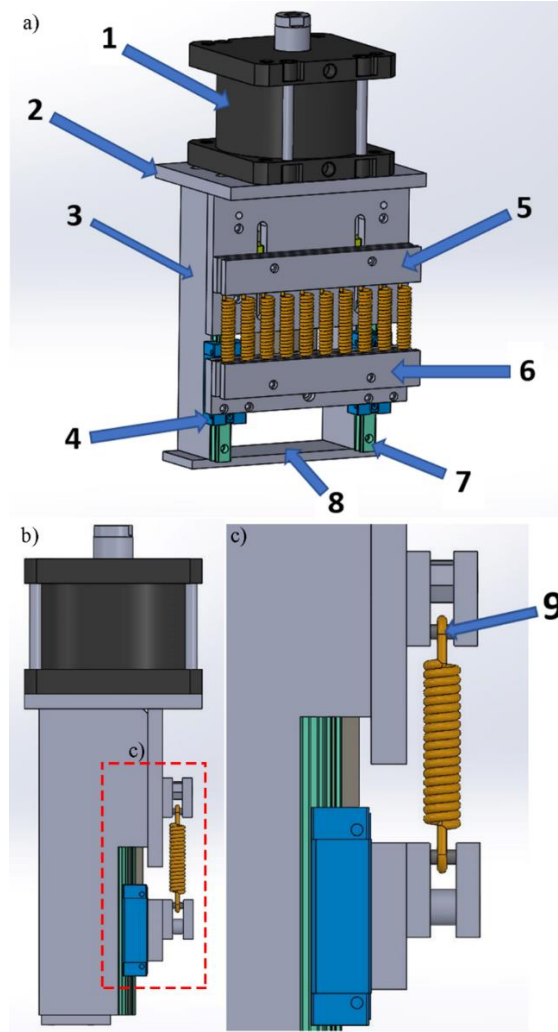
Machine design views from a) Isometric perspective, b) Left and c) Partial detail from the left view
